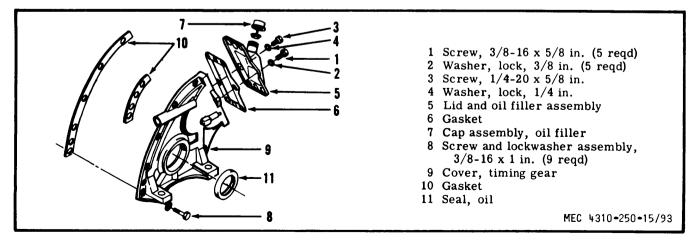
Engine Timing Gear Cover, Disassembly and Reassembly
